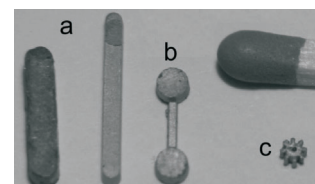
Examples of parts made, prior to sintering. a – bars for bending tests: 2x2x10, 1x1x12 mm b – specimens for tension tests: 0.5x0.5x5 mm c – gearwheels: $Dz = 1\text{ mm}$, $m = 0.15$, $z = 8$
